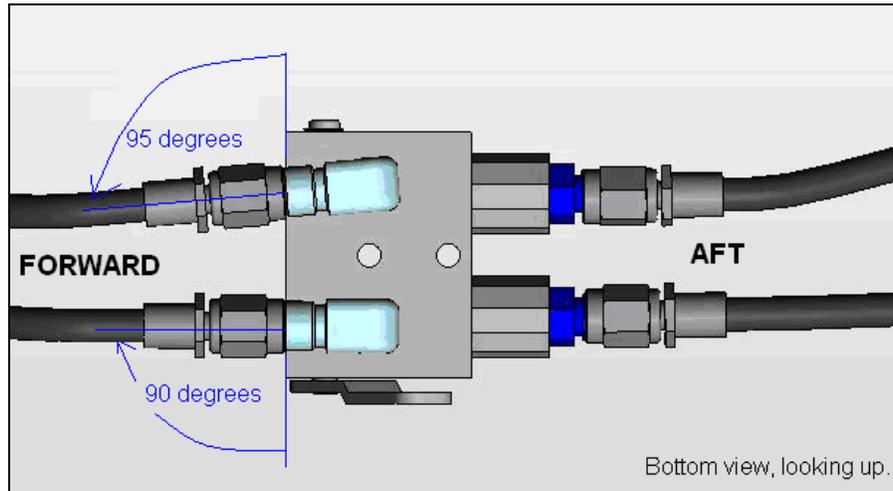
Clocking of Parking Brake Valve Fittings (Earlier Brake Valve ONLY)
